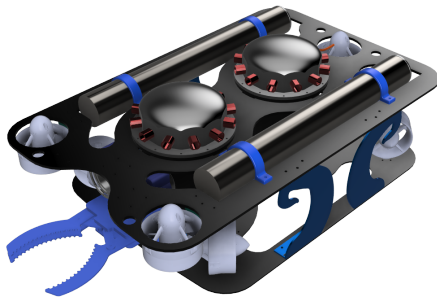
Full Fusion 360 Assembly of Peixonauta
